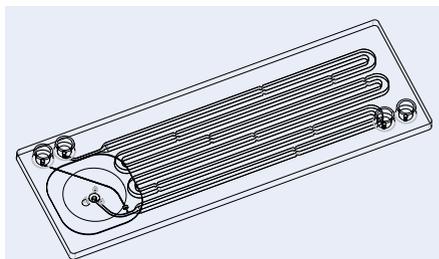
Schematic drawing of blister test chip 761 – 500 μl blisters
